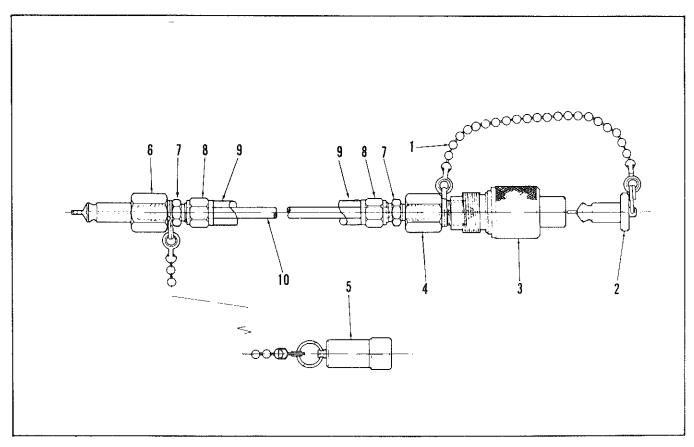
Test Hose Assembly, Part No. 3460-104-1200
